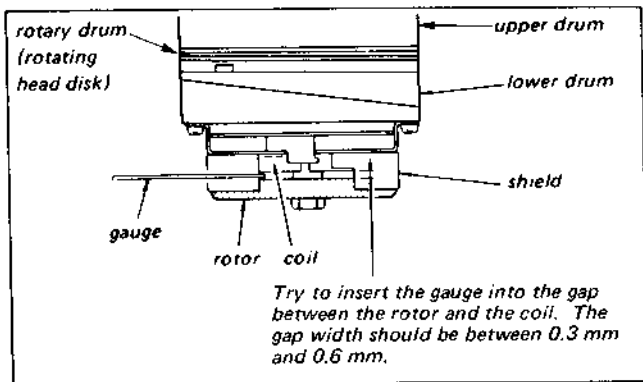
Checking the motor gap width after replacing the drum assembly
